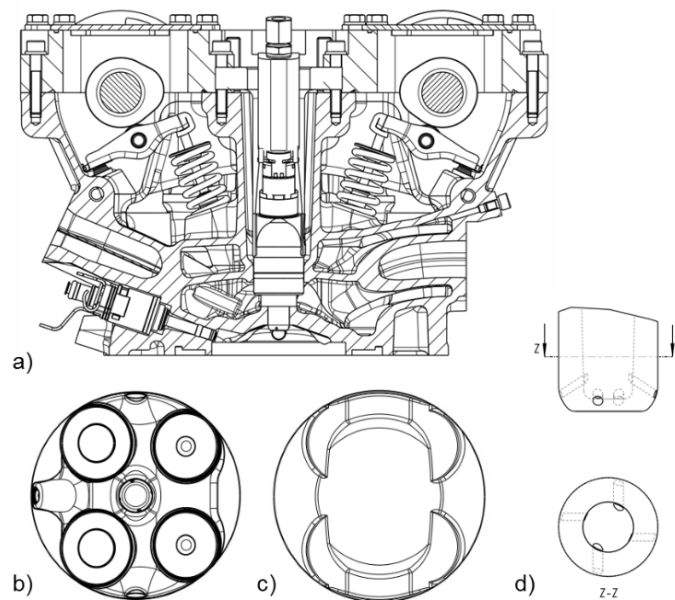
PC engine layout: a) sectional view of cylinder head b) combustion chamber dome c) piston crown for CR=13, d) pre-chamber.
